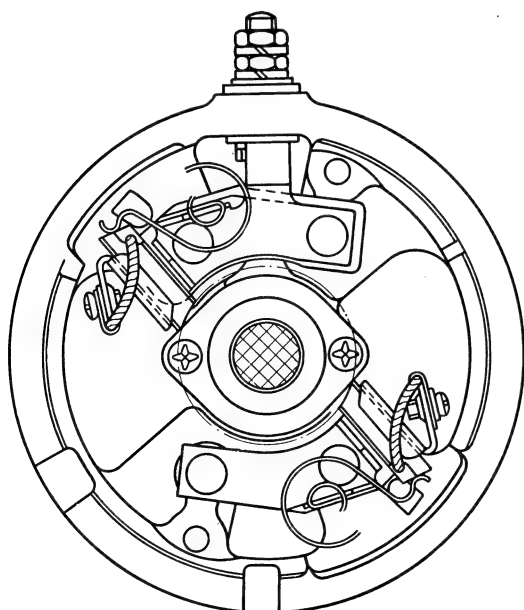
Generator section view across armature shaft, and view of commutator end head.
